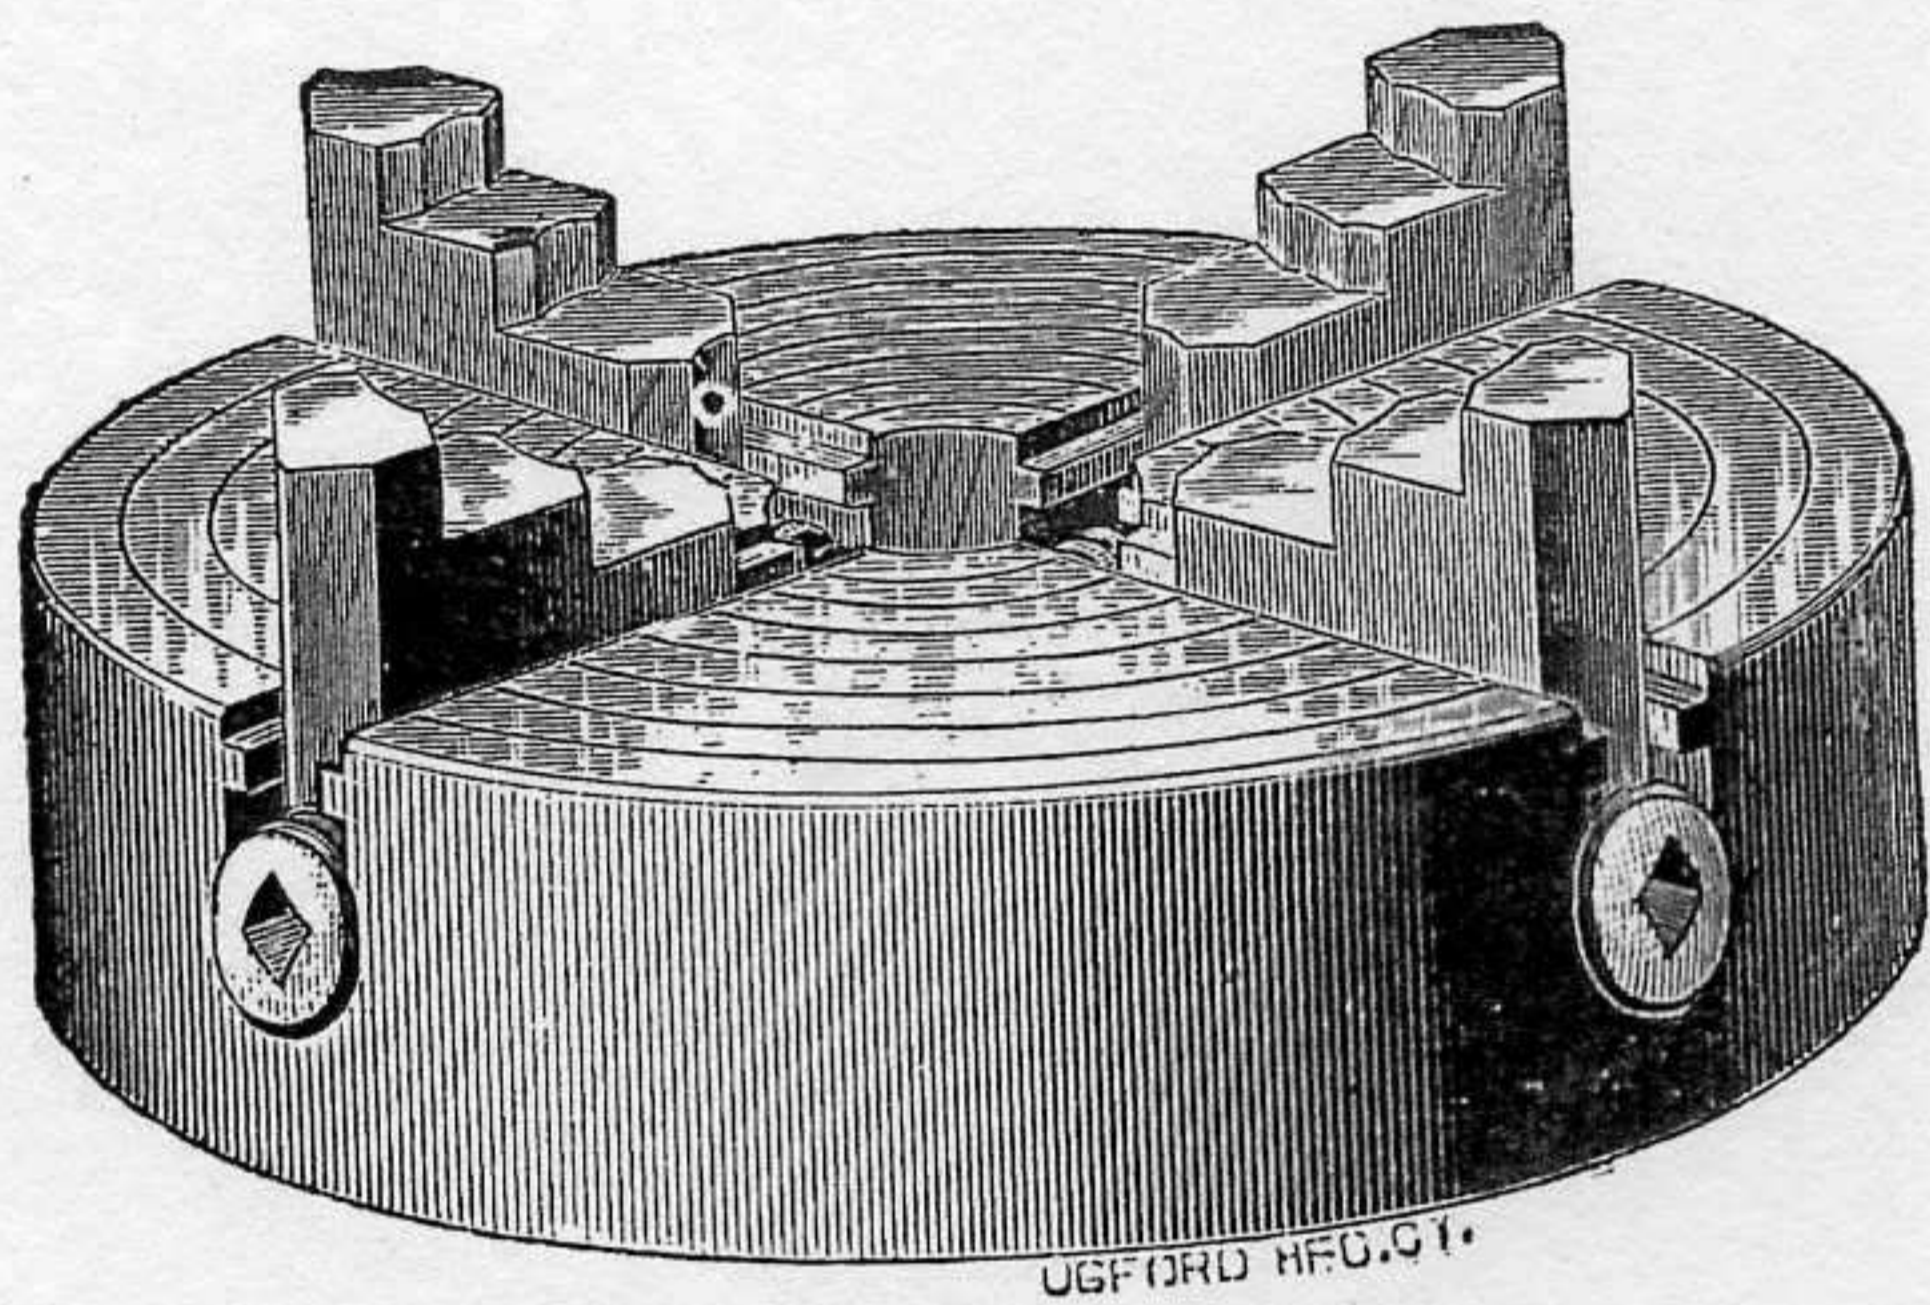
SIX-INCH FOUR-JAWED INDEPENDENT CHUCK
